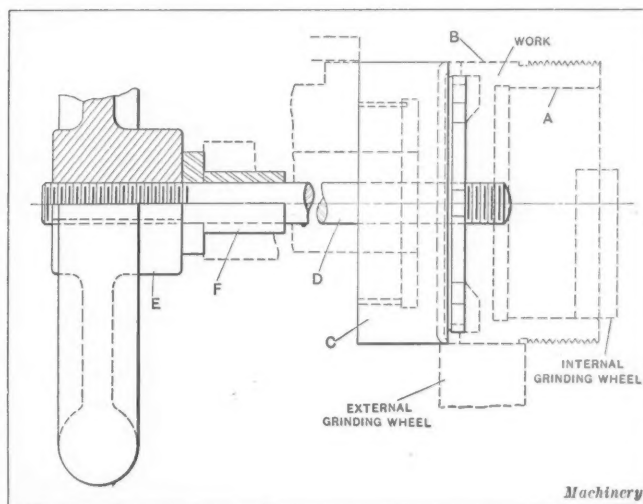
Method of holding Sleeve for grinding Internal and External Diameters at Same Setting
